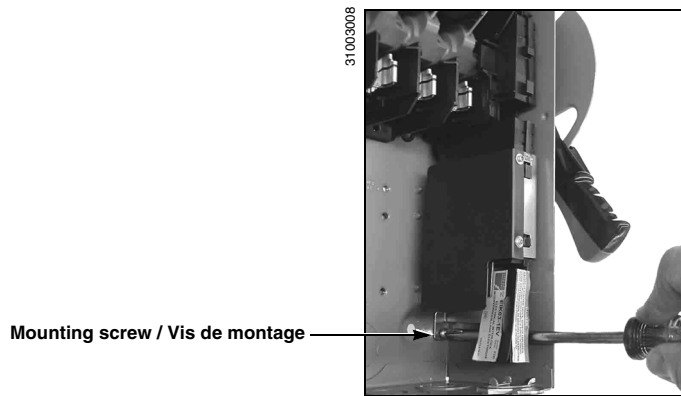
Snap Switch Bracket Assembly / Assemblage du support de l'interrupteur à ressort
